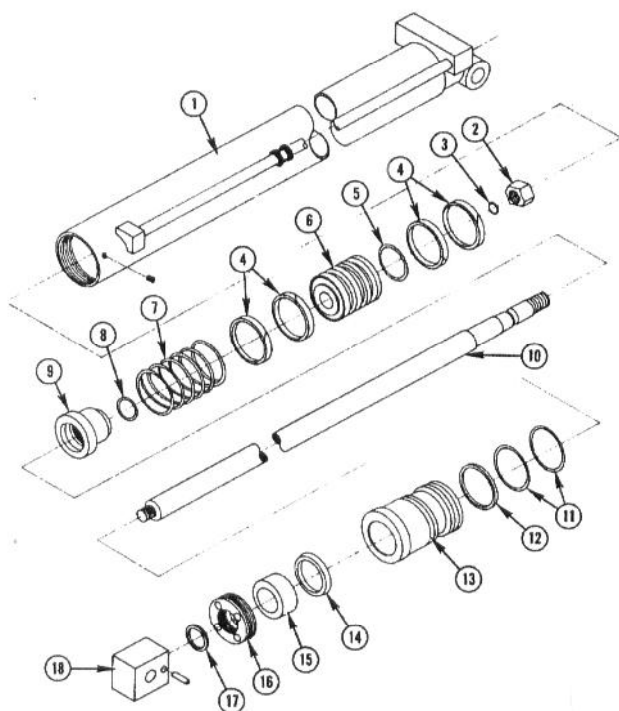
Identification of Cylinder Parts — for Dipperstick Extension
